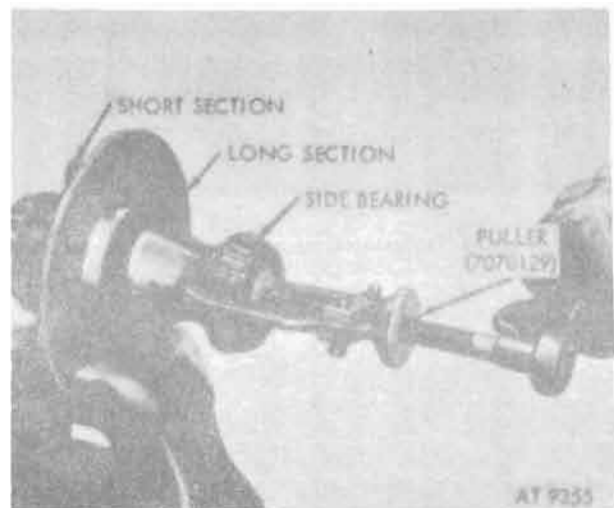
Using puller (7078129) to remove side bearing from case section.
